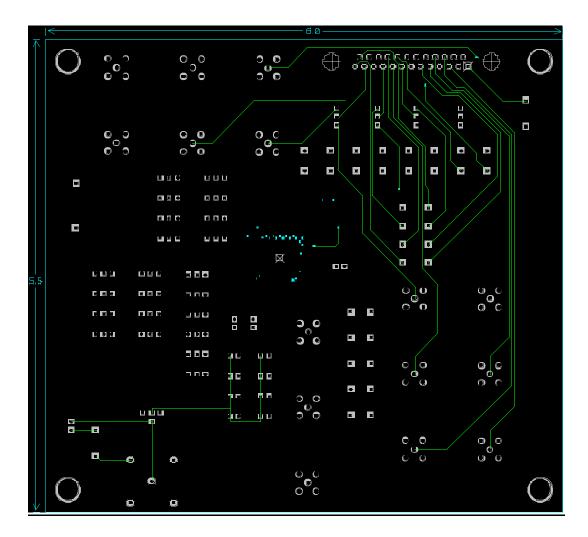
SP3508 Evaluation Board Layout Bottom Layer
